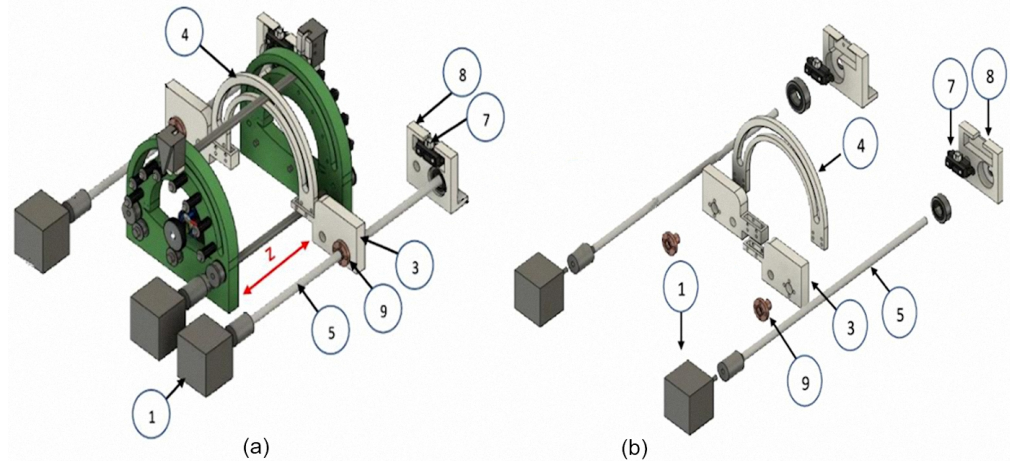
3D model of the stereotactic positioning system. (a) Z-axis and the available length to displace the antenna, (b) exploded view of the stereotactic positioning system for displacement in the Z-axis, showing the parts used for the assembly. The stepper motor (1) was coupled one side to the spindle (5), the remaining end was placed in a holder (8), maintaining the line stability and avoiding deformation when the weight is concentrated in some of the ends of the spindle. A piece that will hold the auxiliary stereotactic arc (4) was placed on the spindle, this piece (3) has a space to place a toothed nut (9), and this allows it to move over the length of the spindle. An infrared sensor (7) was placed on the spindle (8) to monitor the displacement in the Z-axis.
